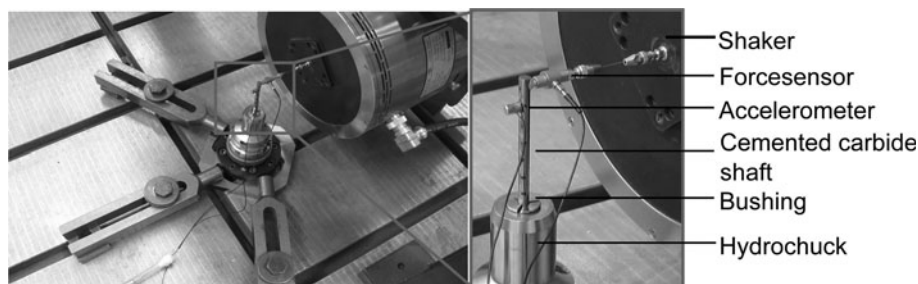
Setup for the modal testing of a cemented carbide shaft in a hydrochuck tool holder
